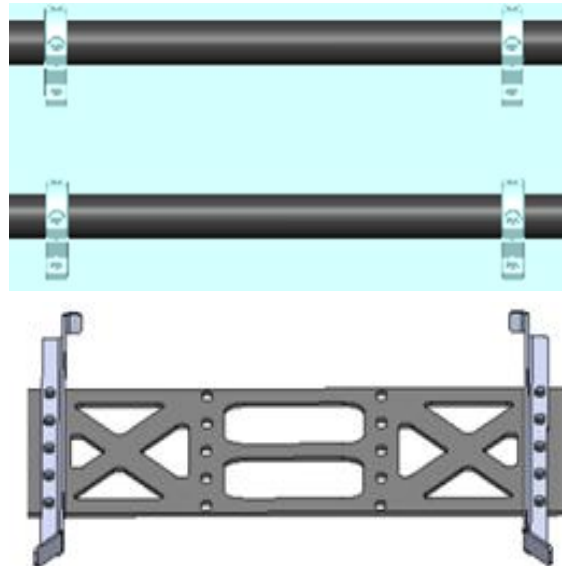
Improvement of fastening structure of working machine. (top : original platform, down : improved platform)
